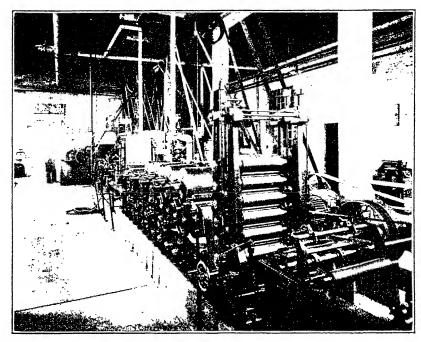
PULP AND PAPER LABORATORY, SHOWING FOURDRINIER PAPER MACHINE AND PULP EQUIPMENT.
